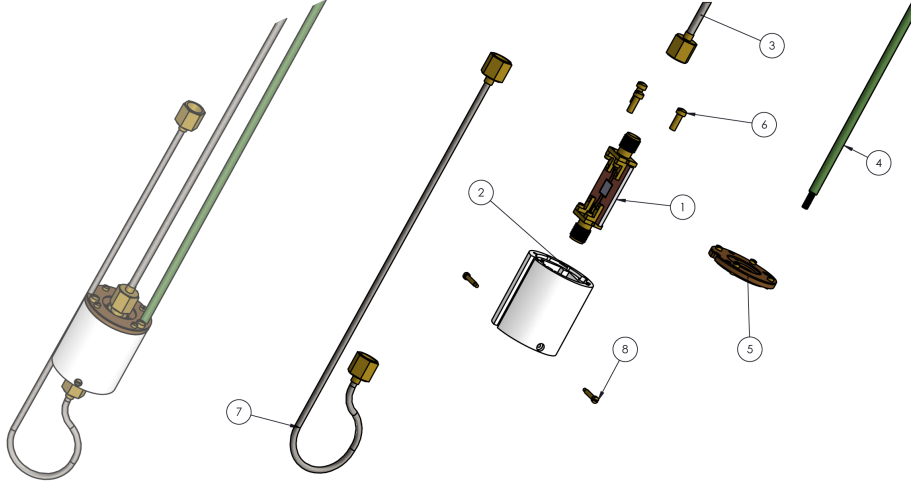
Drawing of the probe assembly. (1) is the CB carriage; (2) is the CB holder; (3) & (7) are non-magnetic, semi-rigid copper coaxial cable (Tek-Stock, UT-085C-LL); (4) is threaded G10 control rod (.125" diameter, 2-56 thread on last .25"); (5) is the gear mechanism; (6) is a 2-56 x .25" brass screw to affix the gear mechanism to the CB holder; and (8) is a pivot screw to restrain the CB carriage within the CB holder.
